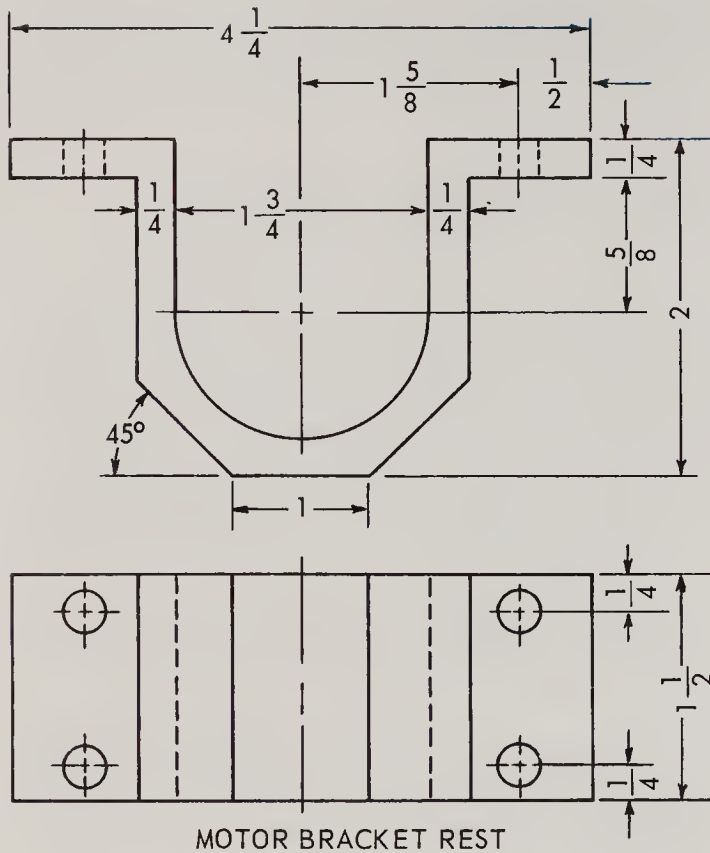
BPR-3. Make a cavalier oblique sketch of the Motor Bracket Rest. Do not dimension.
